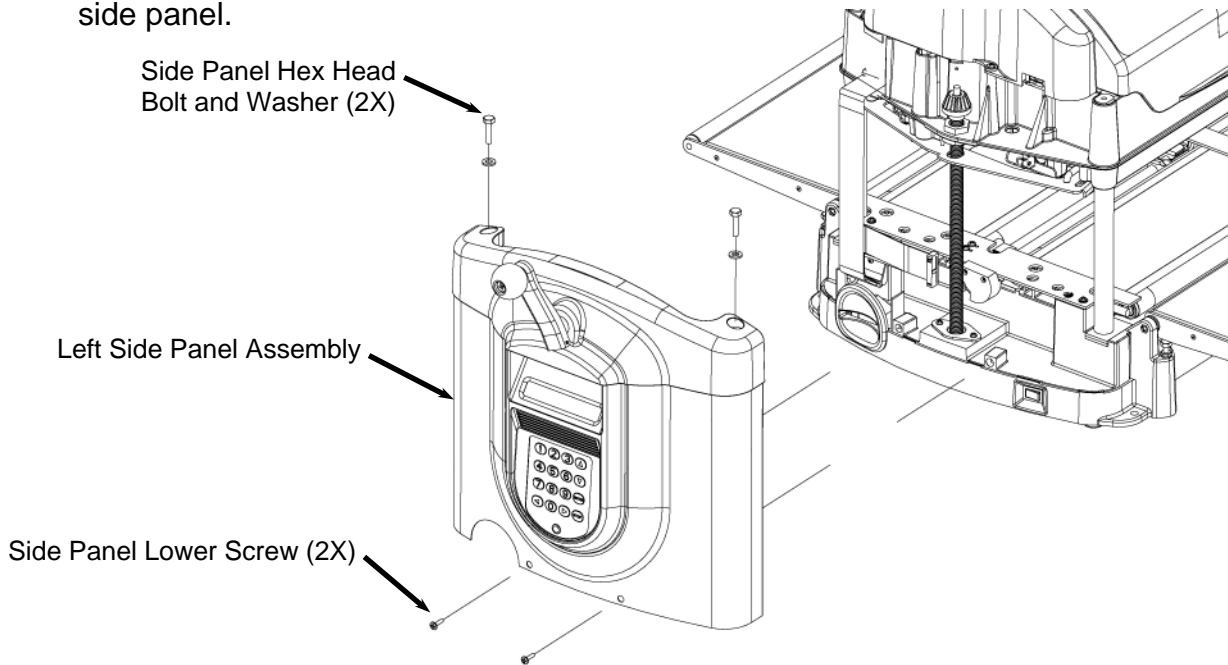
EXPLODED VIEW OF THE LEFT SIDE PANEL FASTENERS
